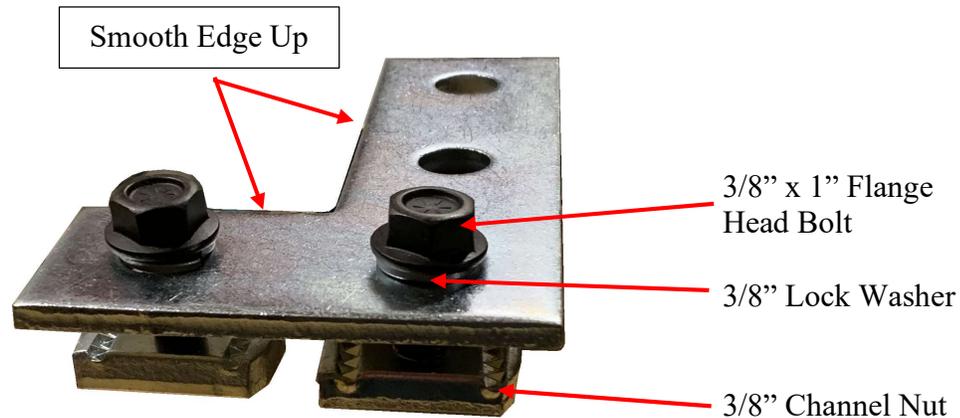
All bolts requiring a Channel Nut must be assembled in the following fashion. This is a Bolt and Channel Nut Assembly. This does not come as an assembled part. You have to assemble each as required in the instructions.
